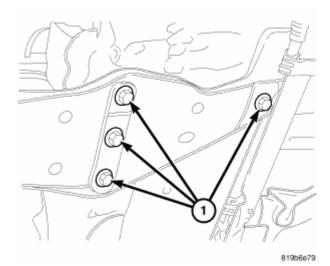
Identifying Front Aft Crossmember Bolts Courtesy of CHRYSLER LLC
